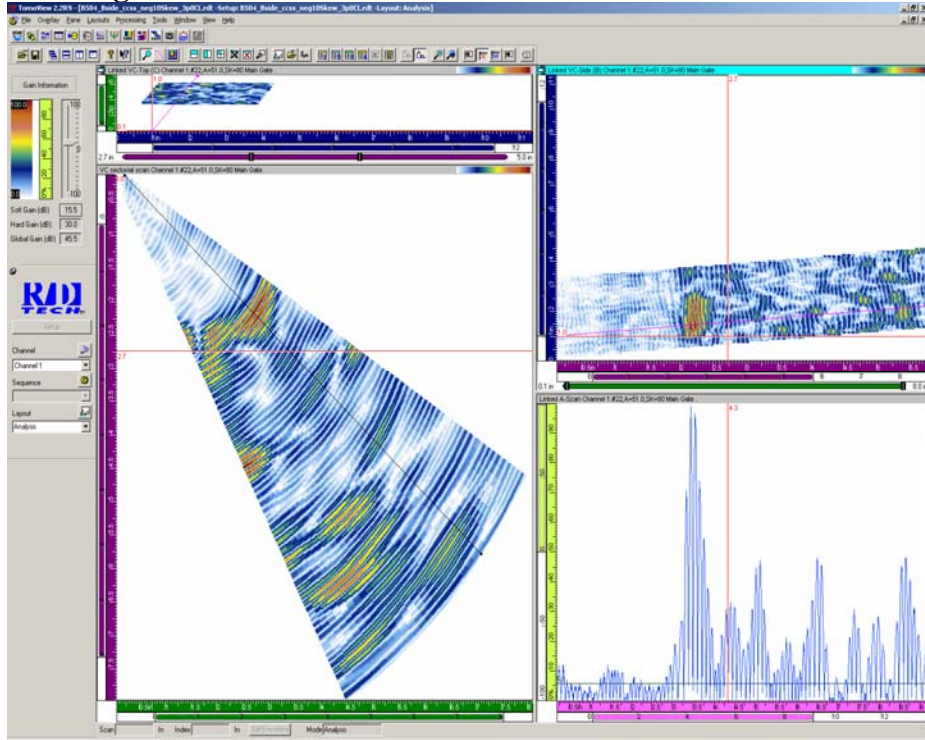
B501 as Inspected from the Equiaxed Side of the Weld, Showing a Yes Detected
